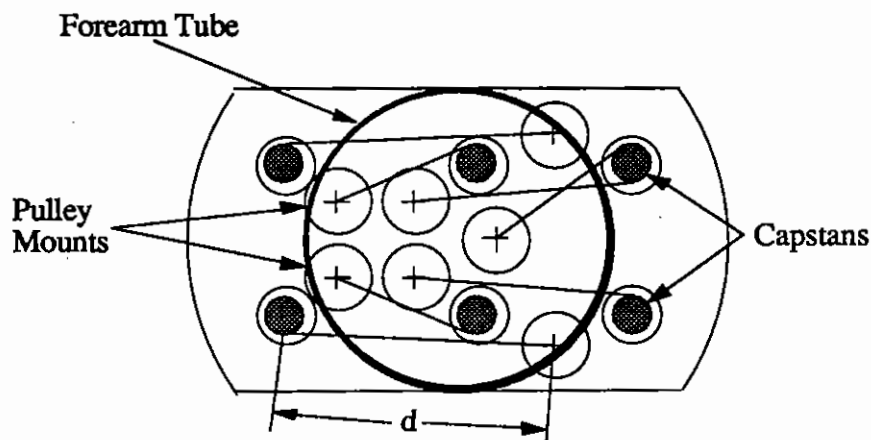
Top Plate of Actuator Package with Cable Distances Maximized.
